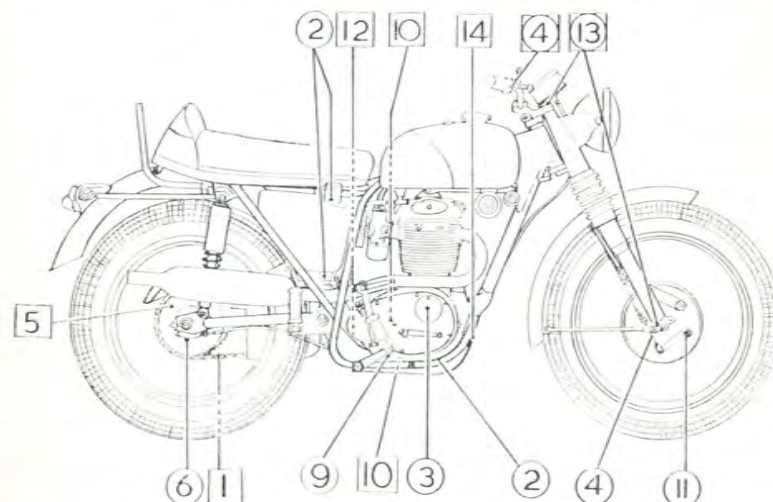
Lubrication diagram. (The Victor Special is shown, but lubricating points for other models are similar).
